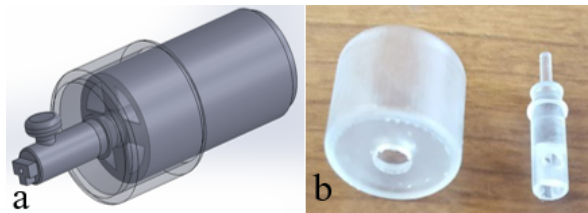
The chosen model of the HHFM quick change of tools mechanism: (a) SolidWorks design and (b) 3D printed
